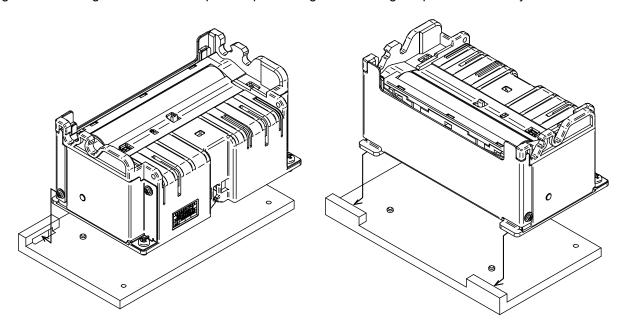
Sample for Positioning and Securing the Printer Main Body (Perspective View)
